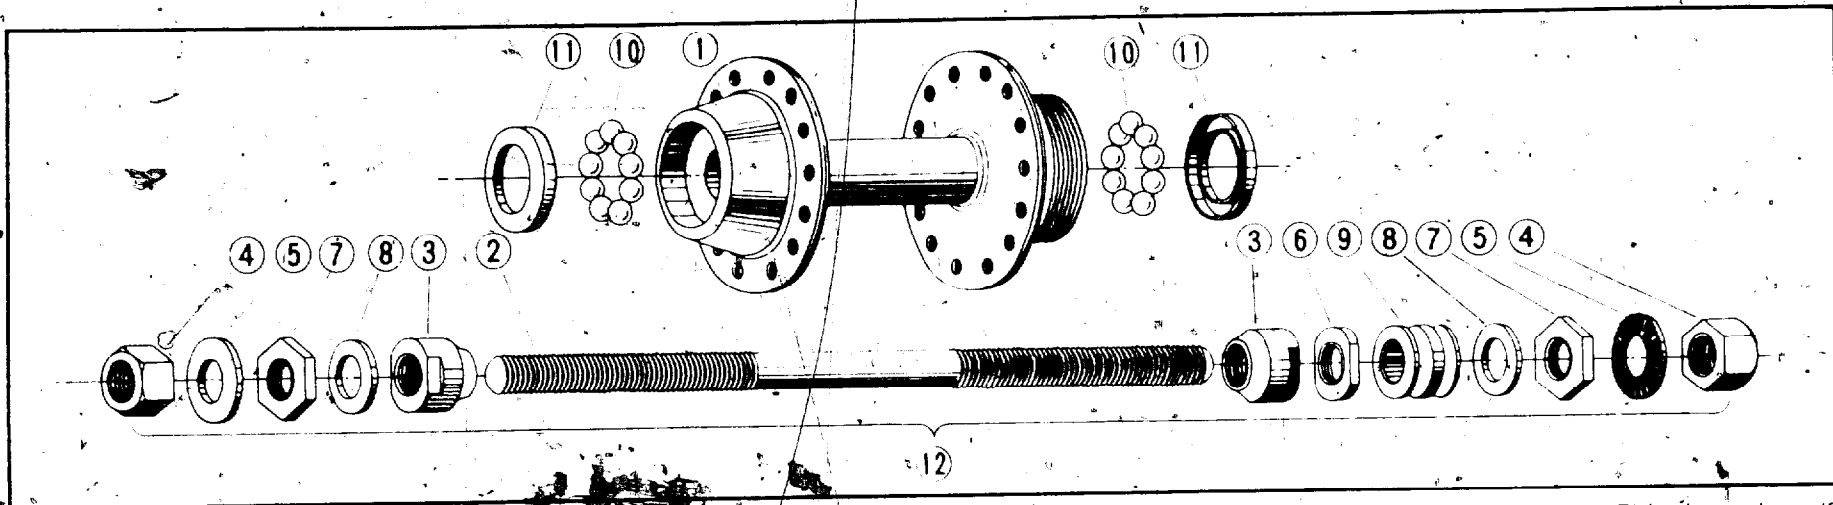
Shimano Model HD-100 rear hub for freewheel with axle nuts. Parts are: (1) hub shell, (2) axle, (3) cone, (4) axle nut, (5) lock washer, (6) lock nut, (7) lock nut, (8) spacer, (9) spacer, (10) steel ball, (11) dust cap, and (12) axle set.
